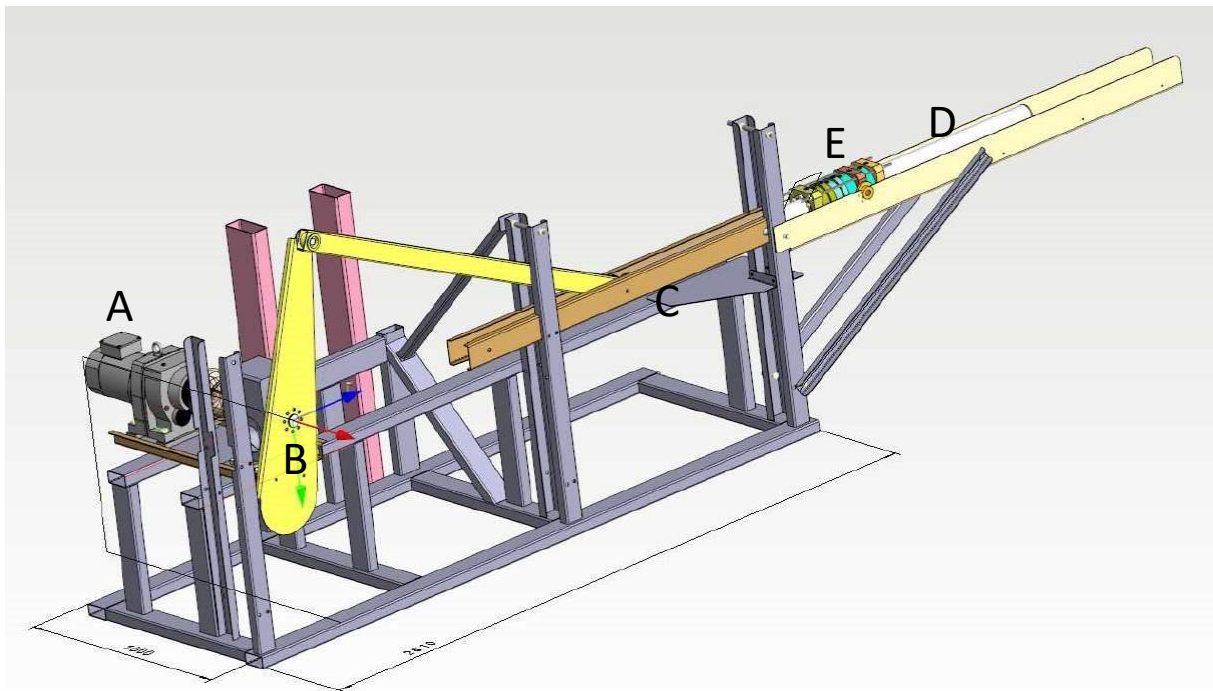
Drawing of the Seawater hydraulic pump seal test rig
